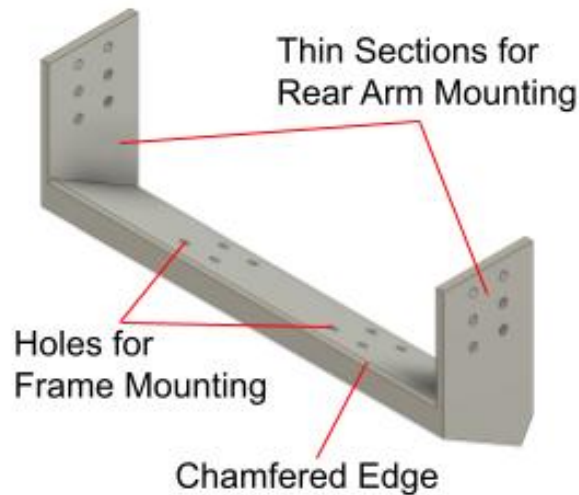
‘C’ Fixture Used for Mounting Rear Arms to Launch Platform Frame
